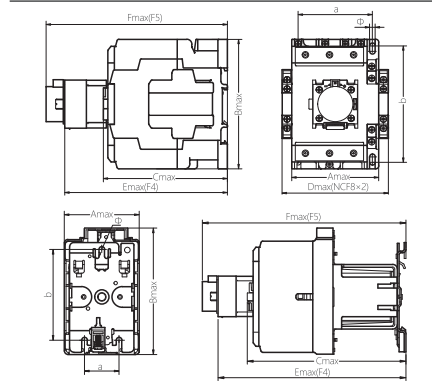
Outline and installation dimensions of NC8-40(Z)~100(Z) series AC contactors
